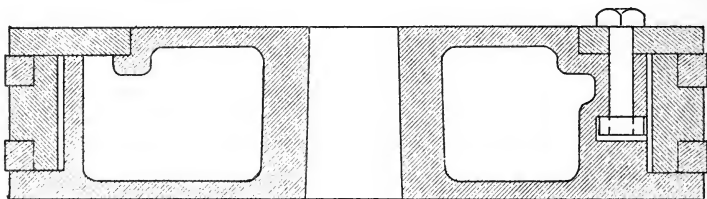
Piston with Ramsbottom Rings on Bull Ring.
